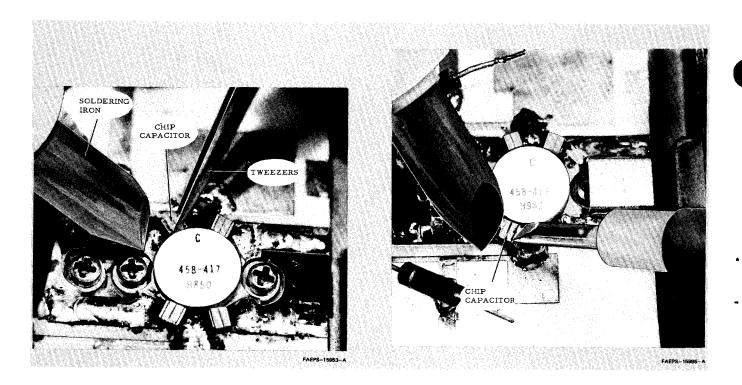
Chip Capacitor Removal Using Two Soldering Irons
